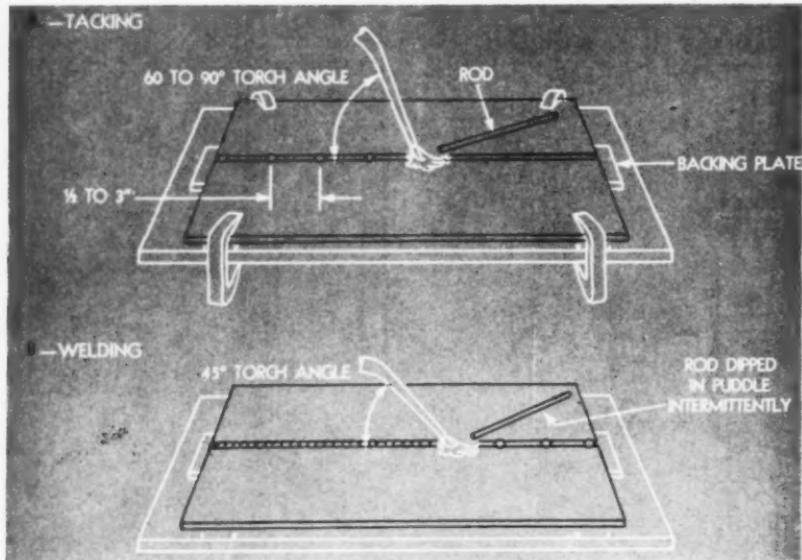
A-B. Sketches showing technique used for tacking and gas welding magnesium.
